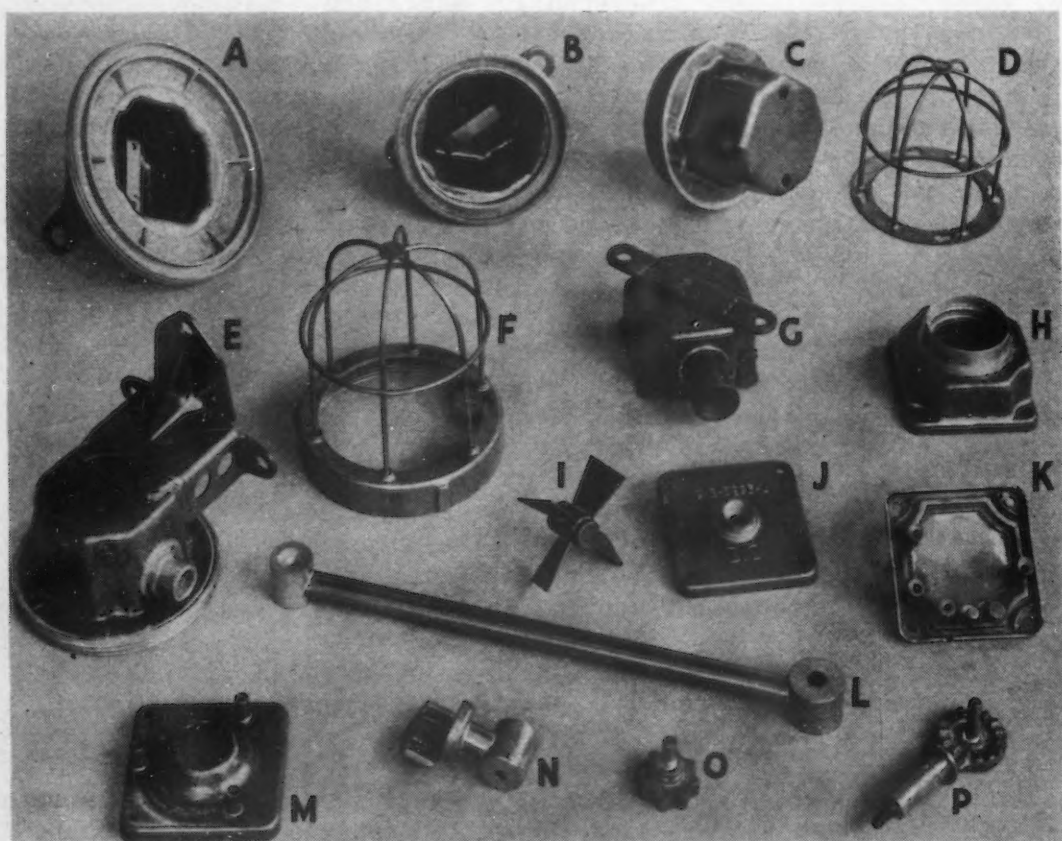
Marine lighting fixture parts, showing 37 of 38 brazed joints made with one flexible gas-air setup. These parts must be able to withstand the vibratory shock caused by a 16-in. shell.
